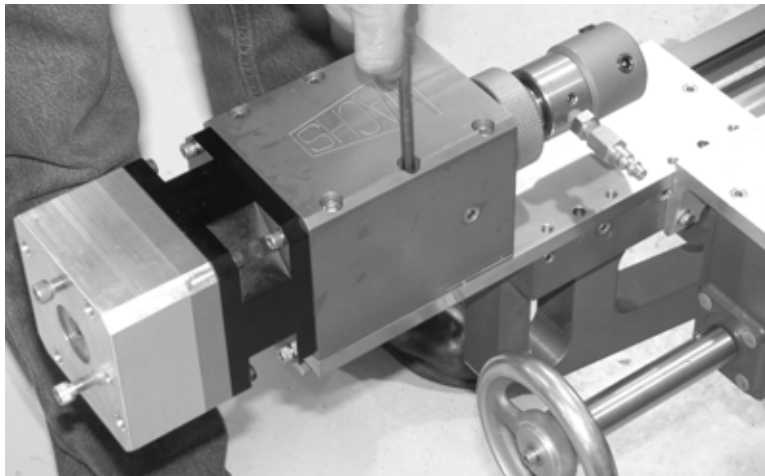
Fasten the drill to the slide with the six screws in the drill housing.
